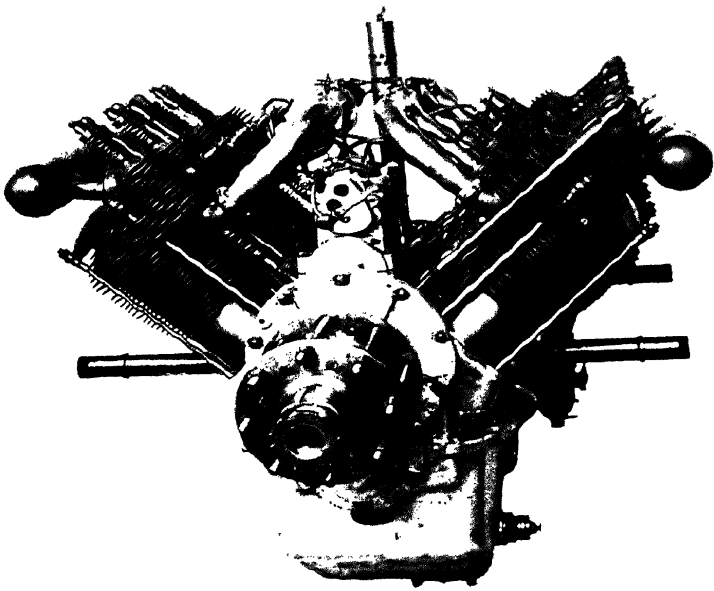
The 80 h.p. air-cooled eight cylinder Xee type Renault engine
